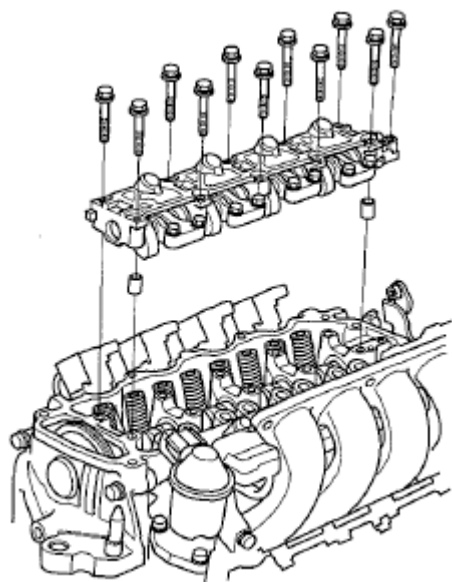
Identifying Rocker Arm Assembly And Fasteners
